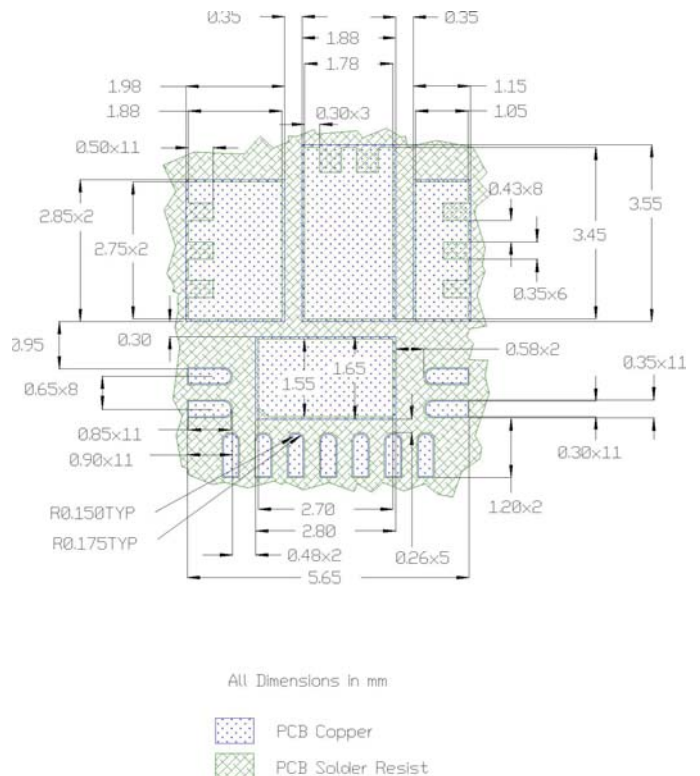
(b) PQFN MCM-outline Solder mask layout
